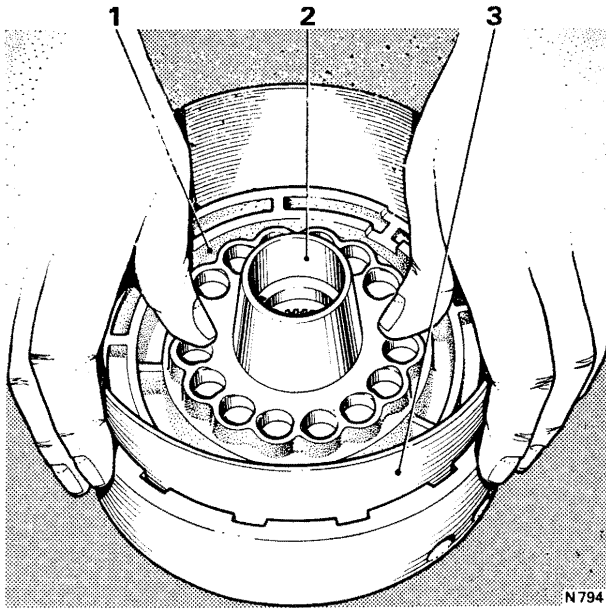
FITTING THE FORWARD CLUTCH PISTON
